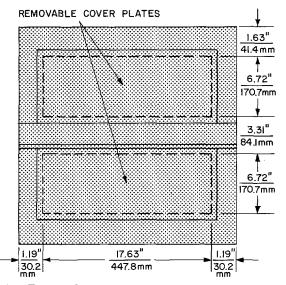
Top conduit entrance space 20-in. (508 mm) deep section
